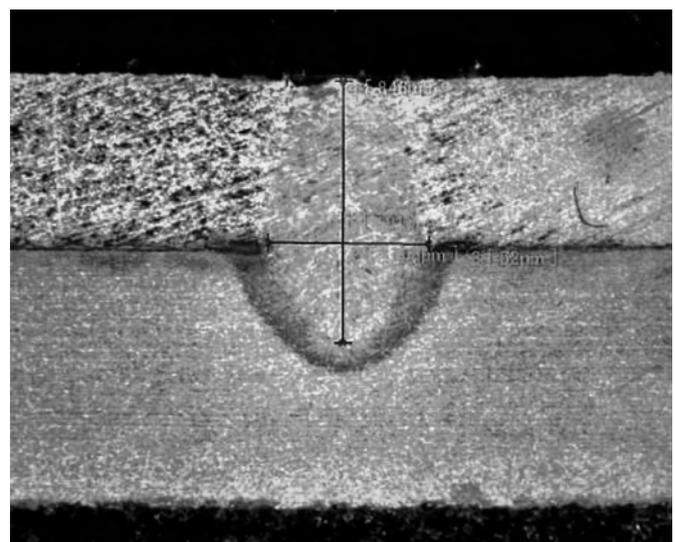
Picture of weld with spacer sheets, with 3 mm defocus.
